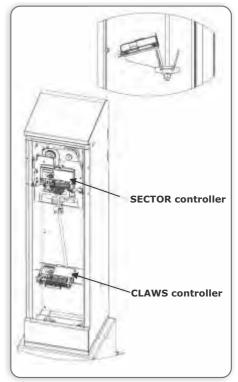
CONTROL CARD CARRIER ASSEMBLY
